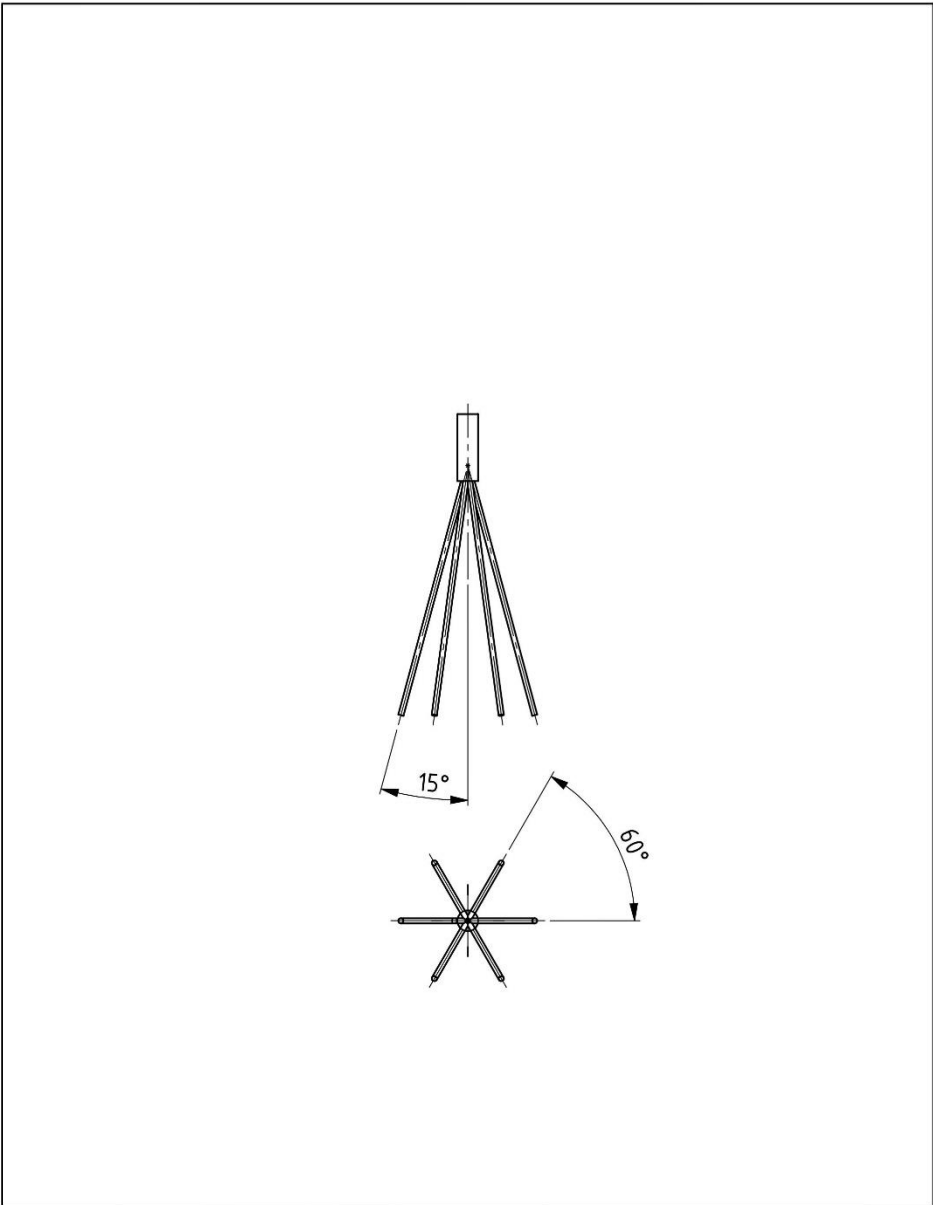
Technical drawing of Model 1 for barley roots, with specified parameters.
